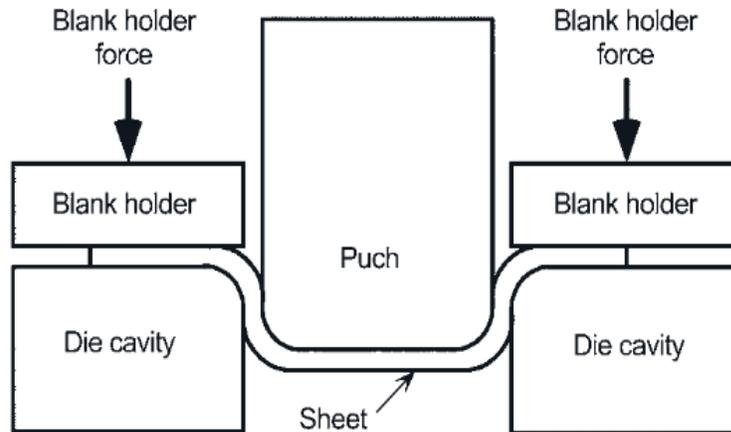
2 Schematic of the deep drawing process (Tekkaya).
